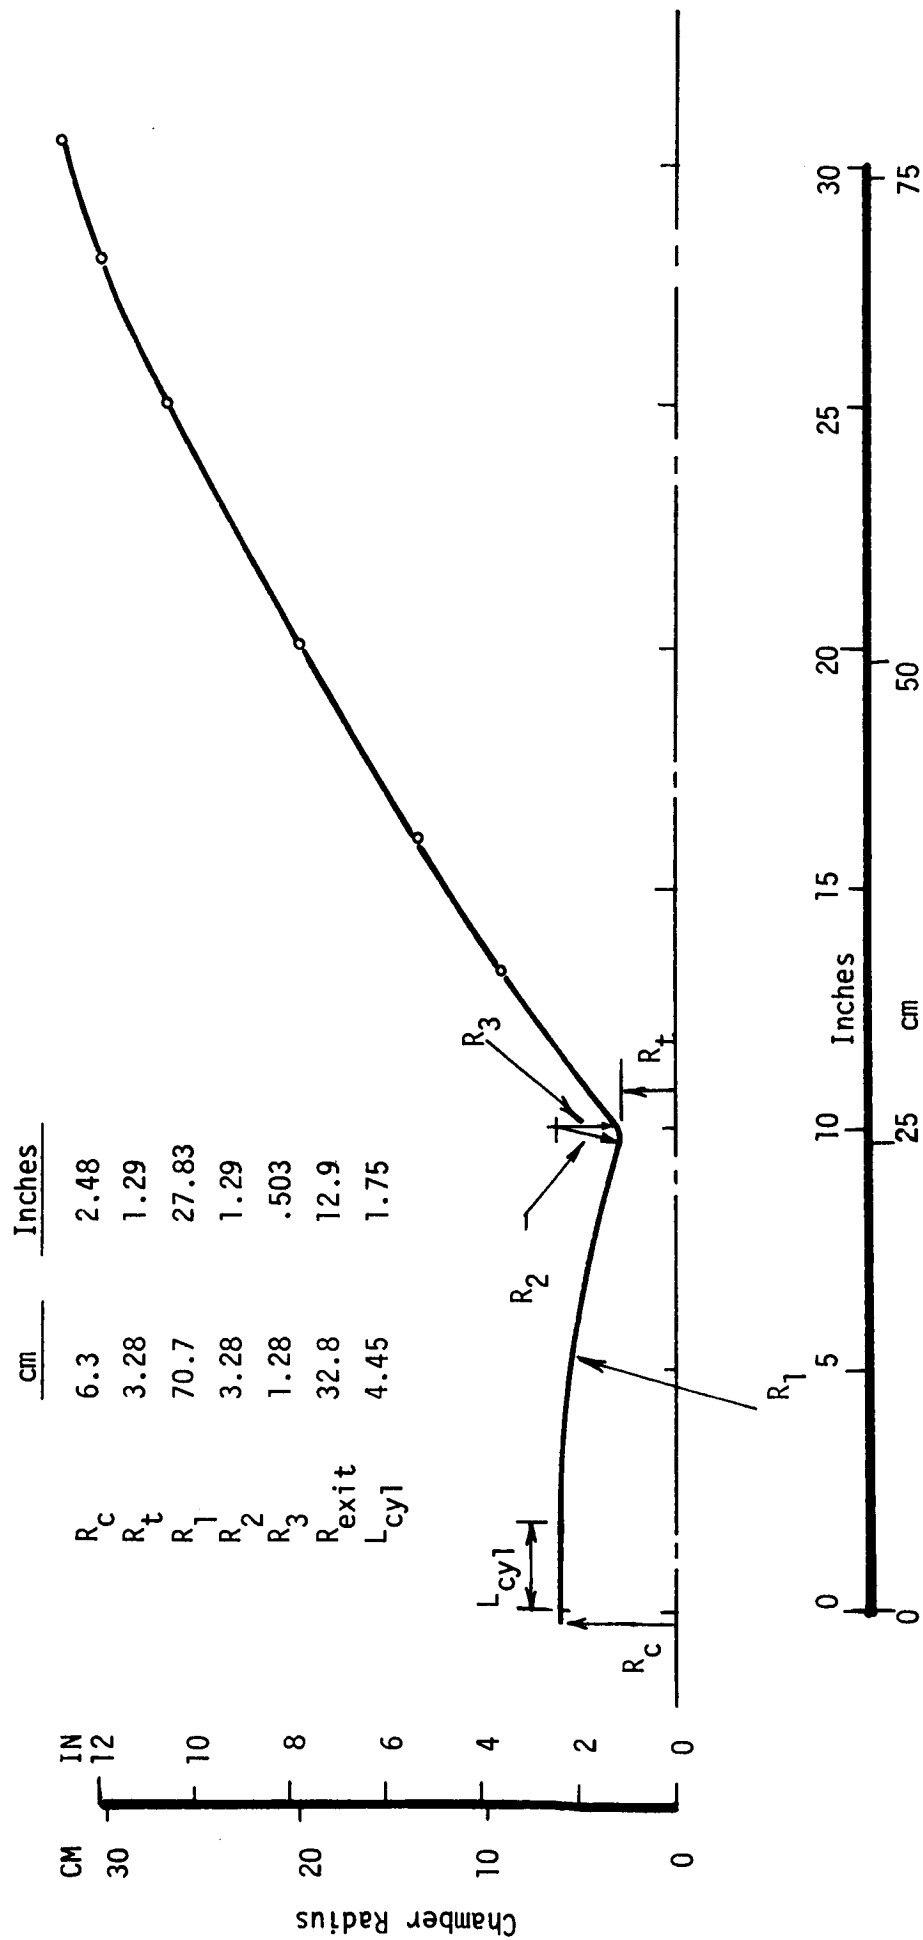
$O_2/H_2$  Space Tug Thrust Chamber Geometry
